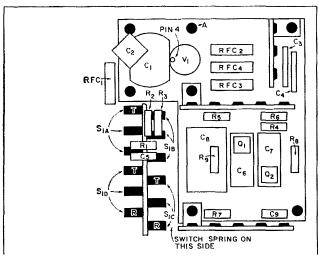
Location of components on the clear plastic sheet. One 3-terminal and two 5-terminal tie-point strips are required.
